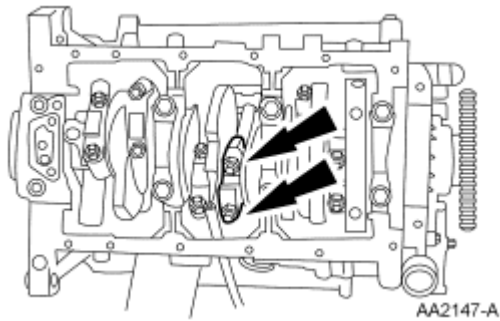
Locating Connecting Rod Bearing Cap & Nuts
